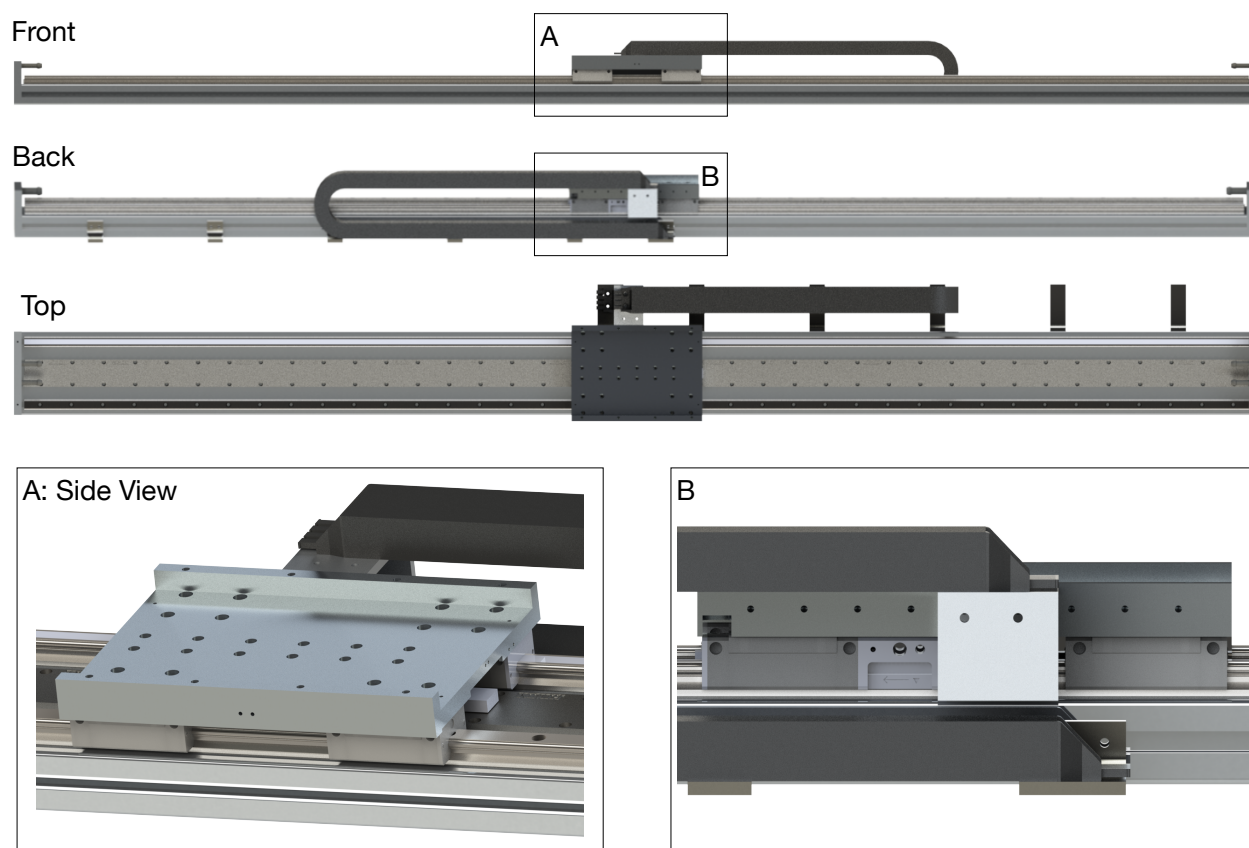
Overview of the linear motor that drives the pendulum cart, with the linear motor cable track and the stage with pre-drilled holes, which allow the installation of user designed parts. This linear motor stage is used to mount the aluminum plate that is used to install the bearing housing and the pendulum arm. (B) Limit switch plate installed on the back side of the linear motor stage.
